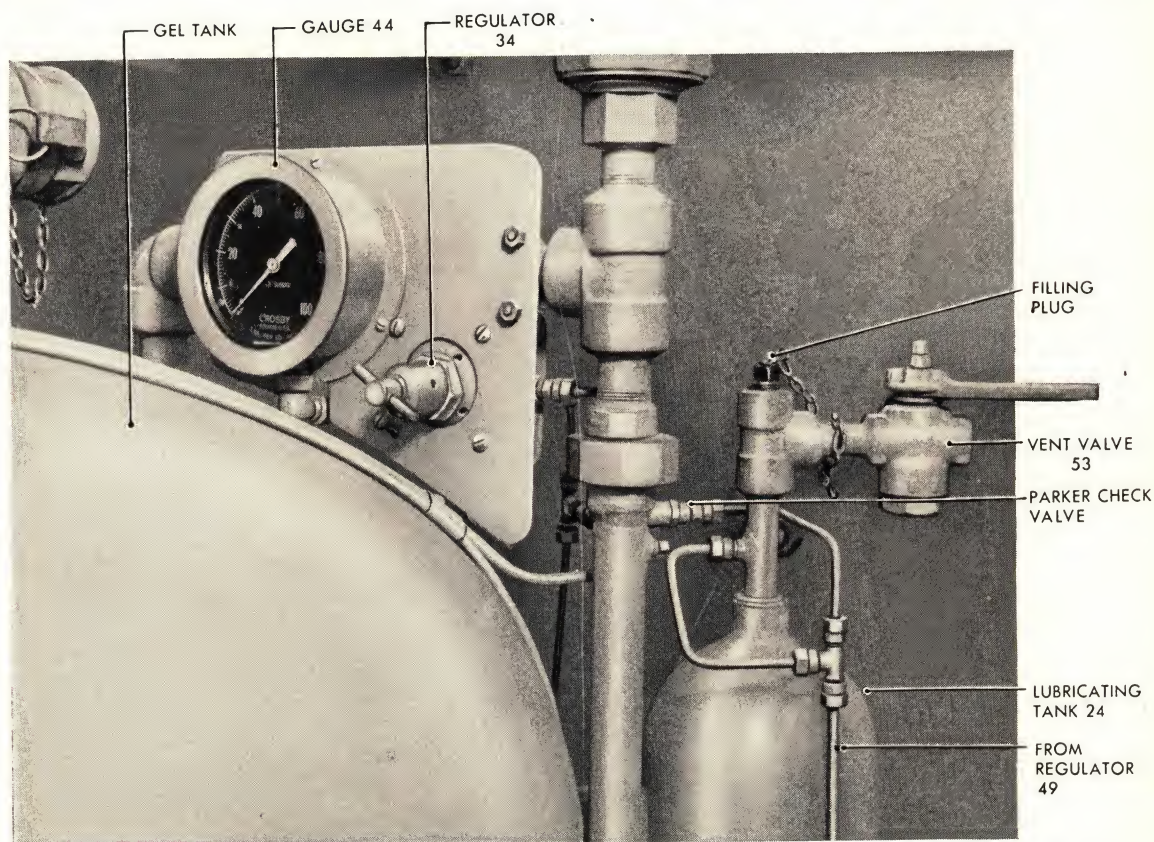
Flame Thrower Mk 1—Fuel Unit Lubricating Fuel Tank, Atomizer Air Regulator, and Gauge
